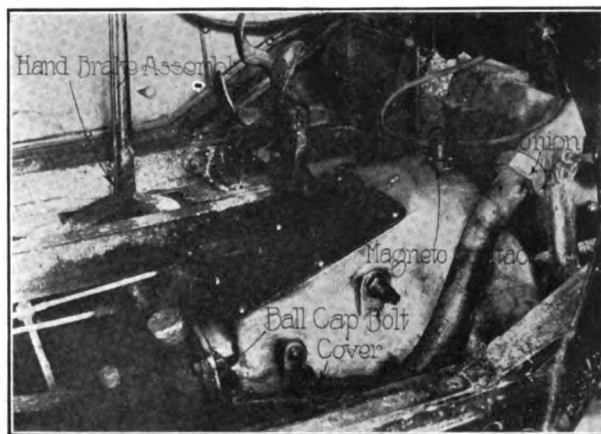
Before Taking Out the Power Plant, Disconnect Nuts and Bolts of Universal Joint Ball Cap.
